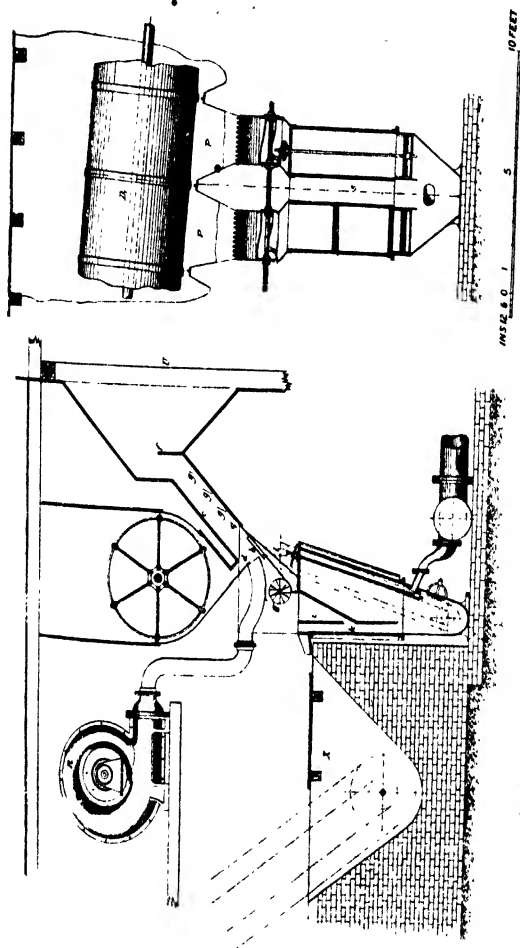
Hochstraate dry coal cleaning machine. Side and end elevations.
